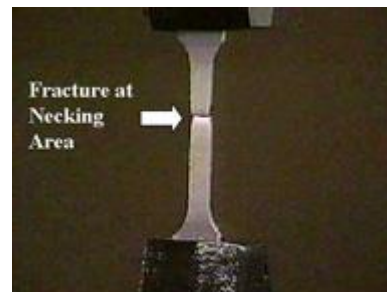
Fracture of a Flat Tensile Test Specimen
